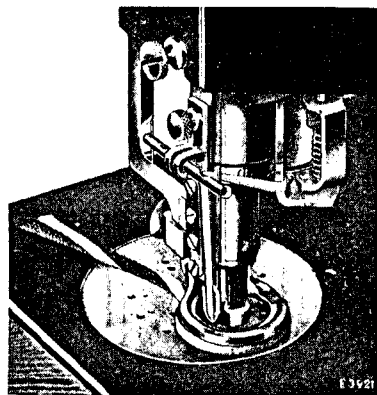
Machine Threaded and Adjusted for Imitation Two Needle Cording
